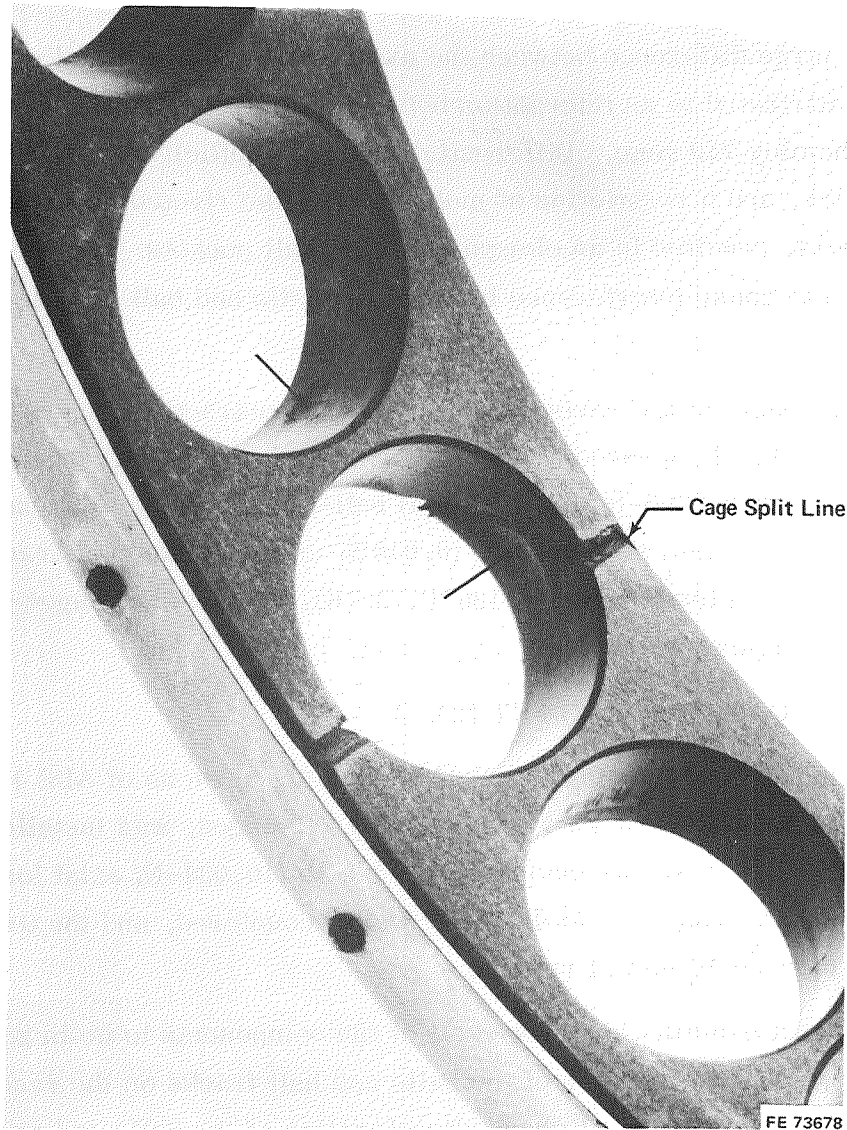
Chemloy 719 Cage From Front Bearing S/N 225 Showing Pocket Wear Patterns
